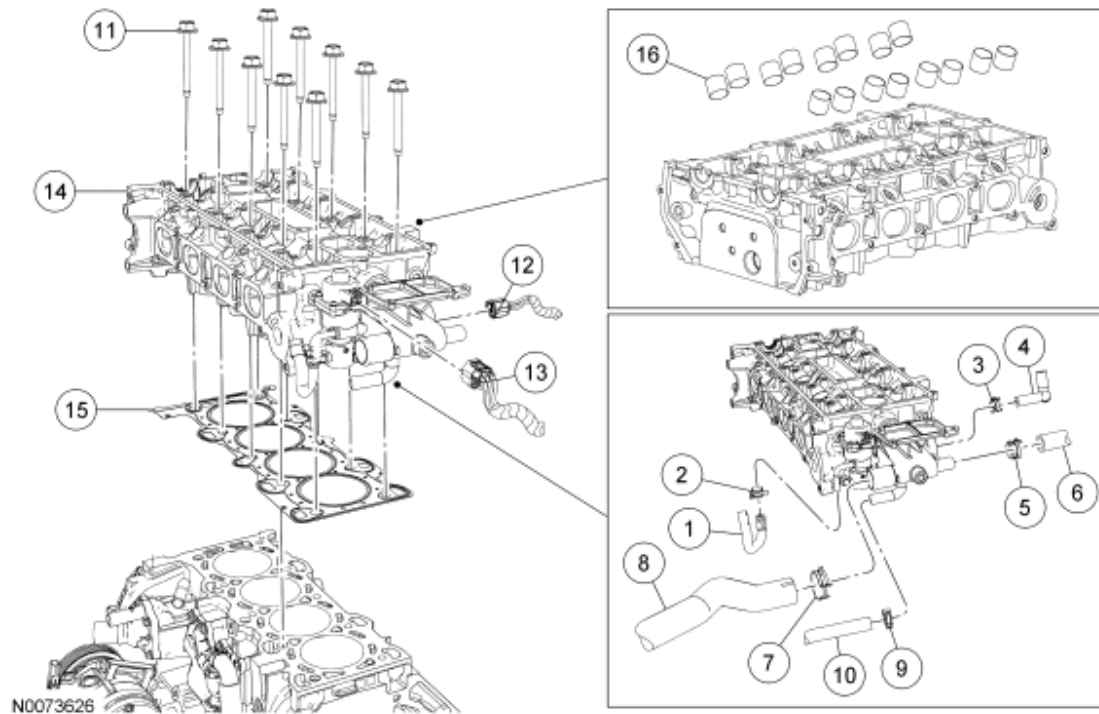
Exploded View Of Cylinder Head (3 Of 3)
